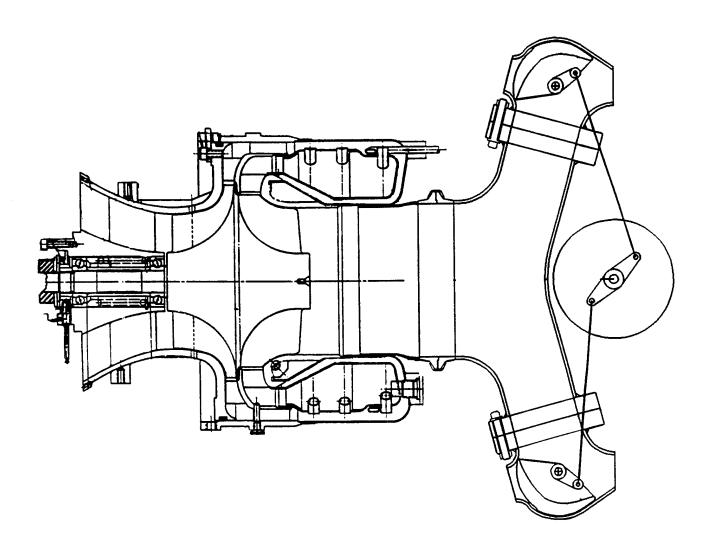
Sundstrand TJ-90 with prototype reverser installed
